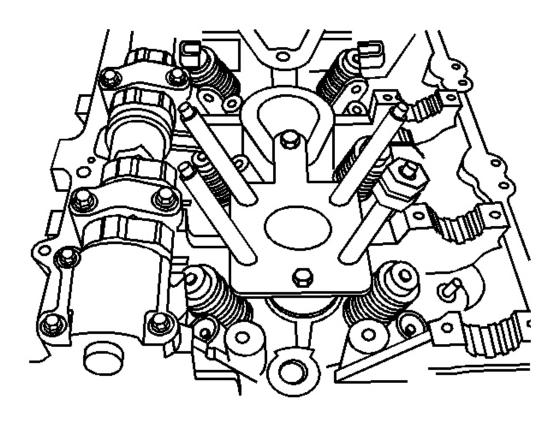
View Of J 44228 Base Plate Courtesy of GENERAL MOTORS CORP.
